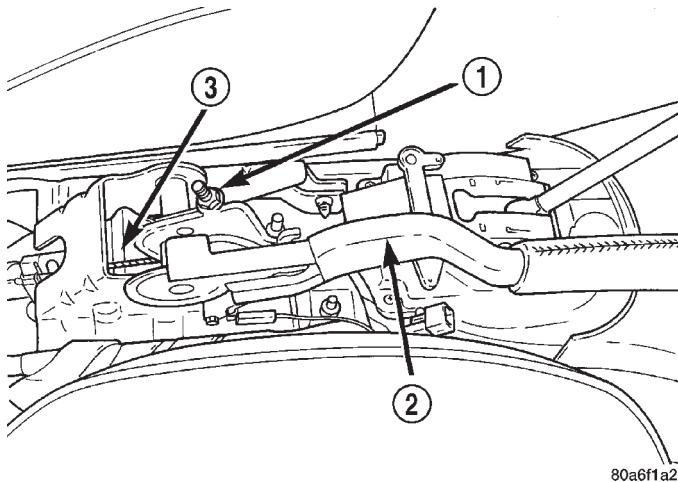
Park Brake Lever Output Cable Adjustment Nut
